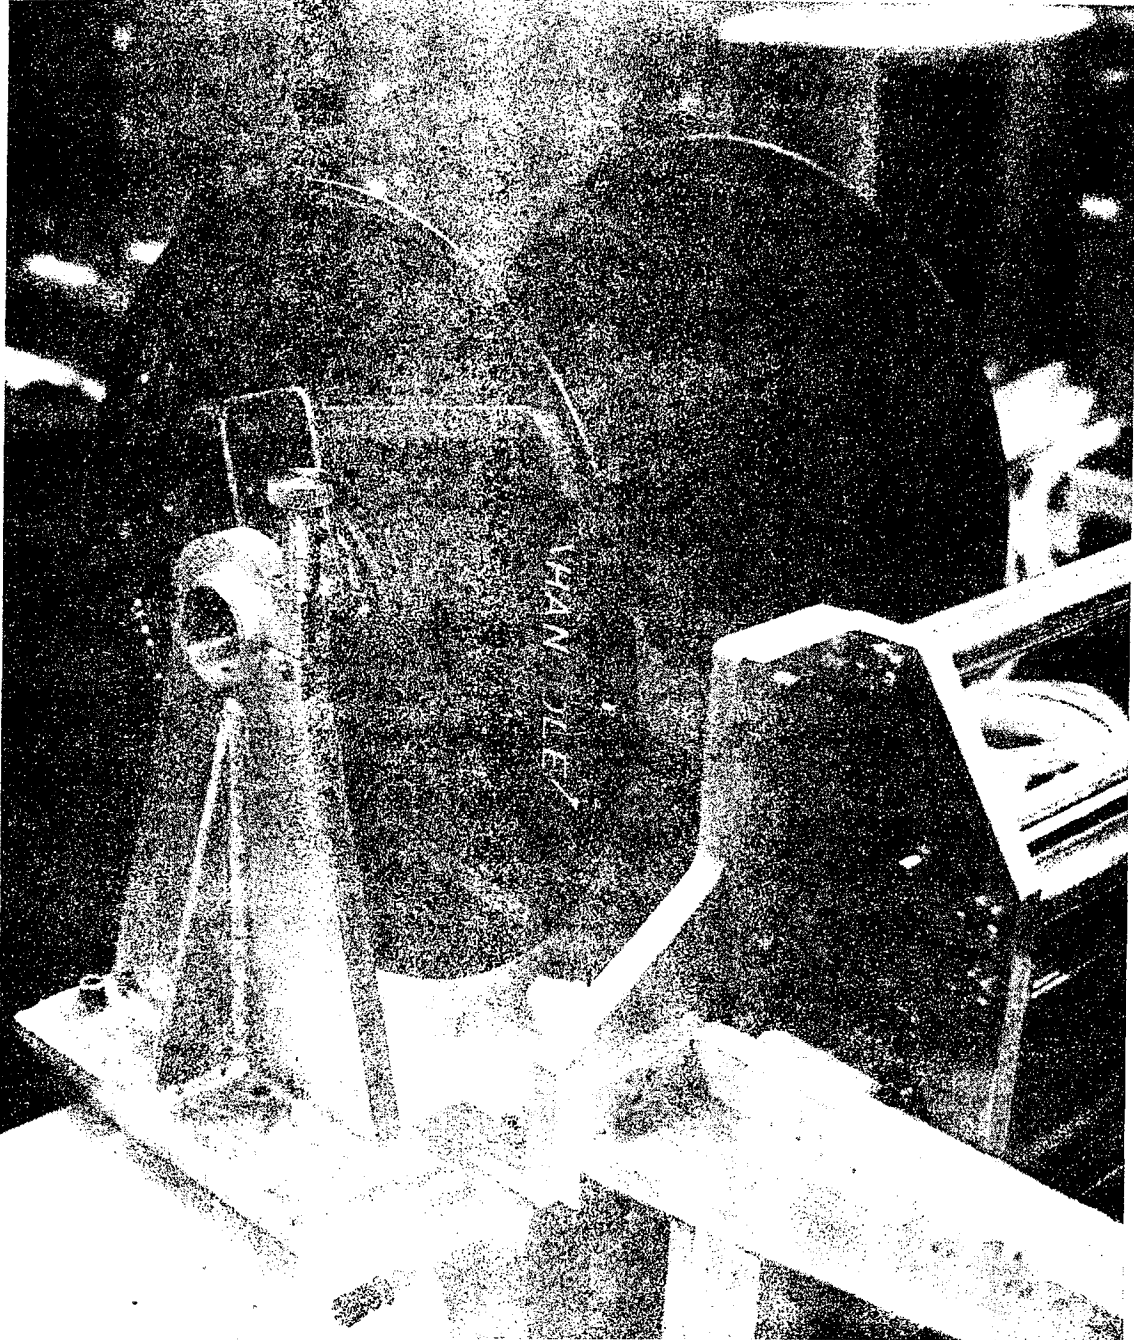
Film Take-Up Assembly - Spool and BSC Mounting Flange
